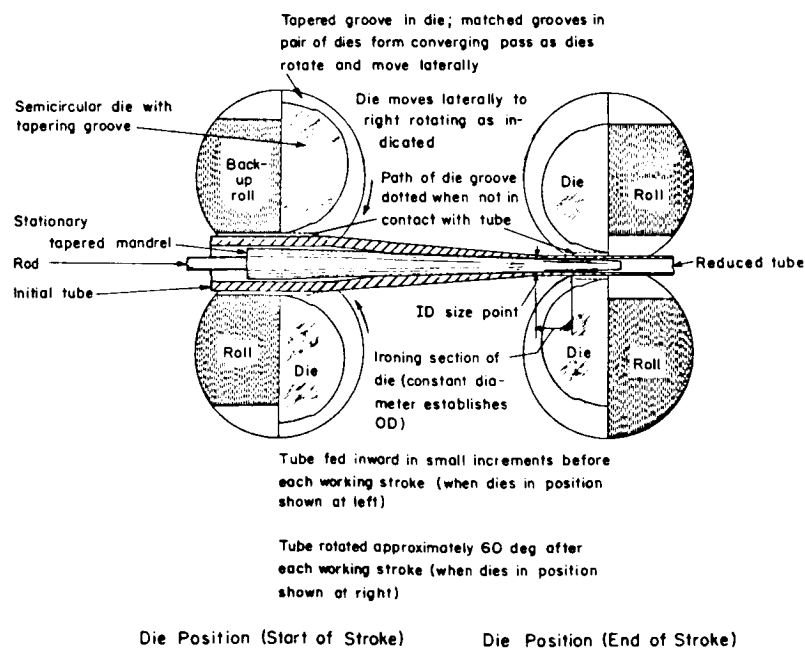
VERTICAL SECTION THROUGH TUBE-REDUCER PASS SHOWING DIES AT START AND END OF STROKE (REF. 14)
